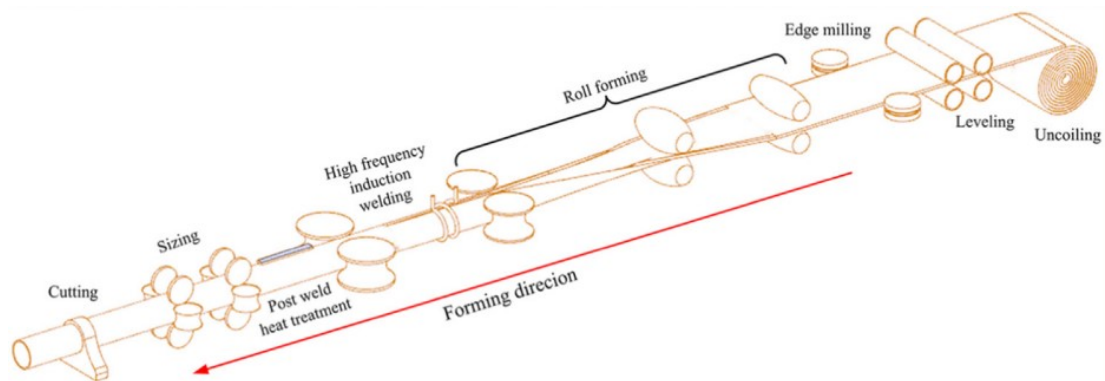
Schematic of HFI welded pipe manufacturing process [1].
